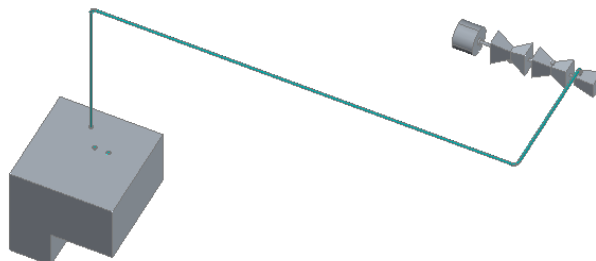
Pipe added between top nozzle of the Boiler Drum and inlet nozzle of the Super Heater unit on the Boiler
